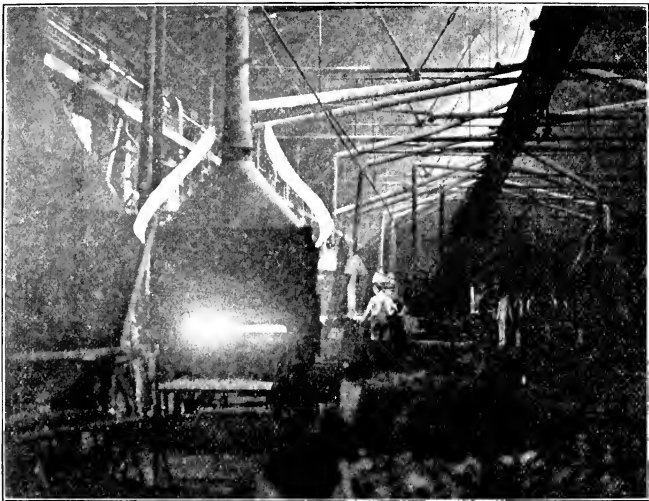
Illustration No. 1. Exhaust hood over oil furnace in forge shop. Exhaust reduces excessive heat from which workingmen previously suffered, without impairing heating power at point of work.
